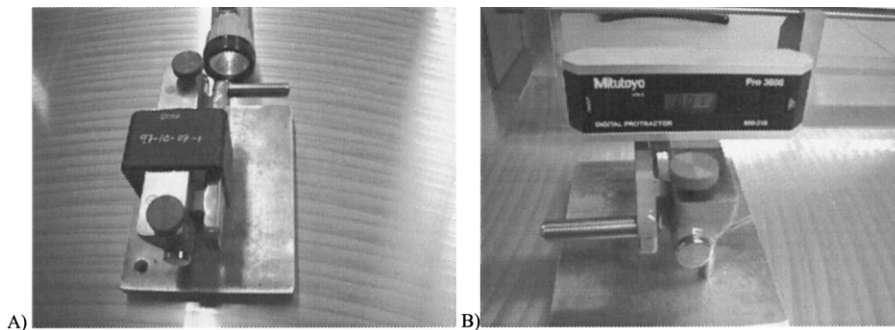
(A) Measurement hinge and specimen; (B) Measurement hinge with digital protractor on top surface.
